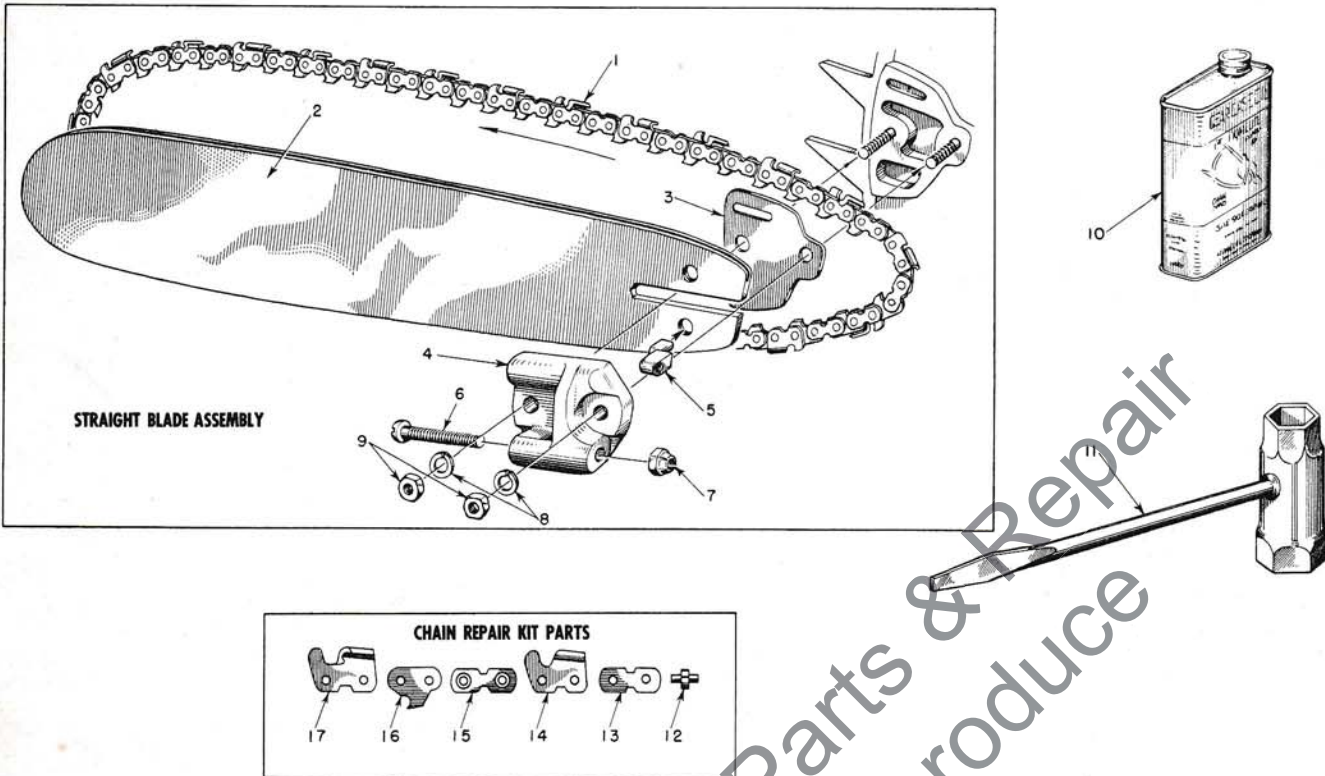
A — BARS AND CHAINS FOR SIX TOOTH SPROCKET-EQUIPPED SAWS
